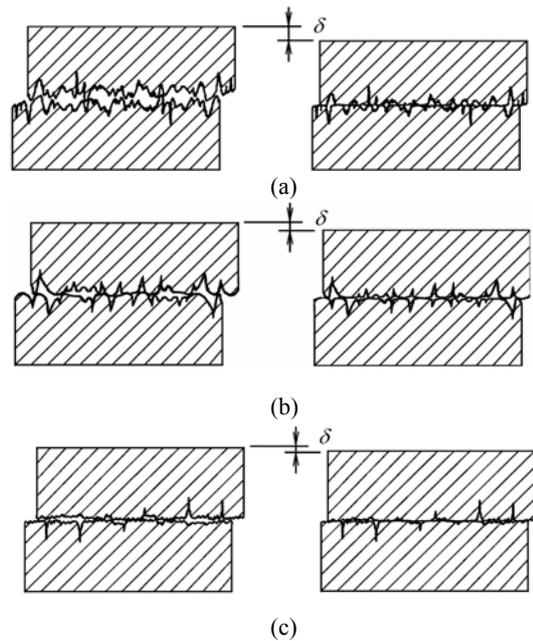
Initial wearing status of different types of surfaces (a) Ground surfaces; (b) ECF surfaces; (c) ECMF surfaces
